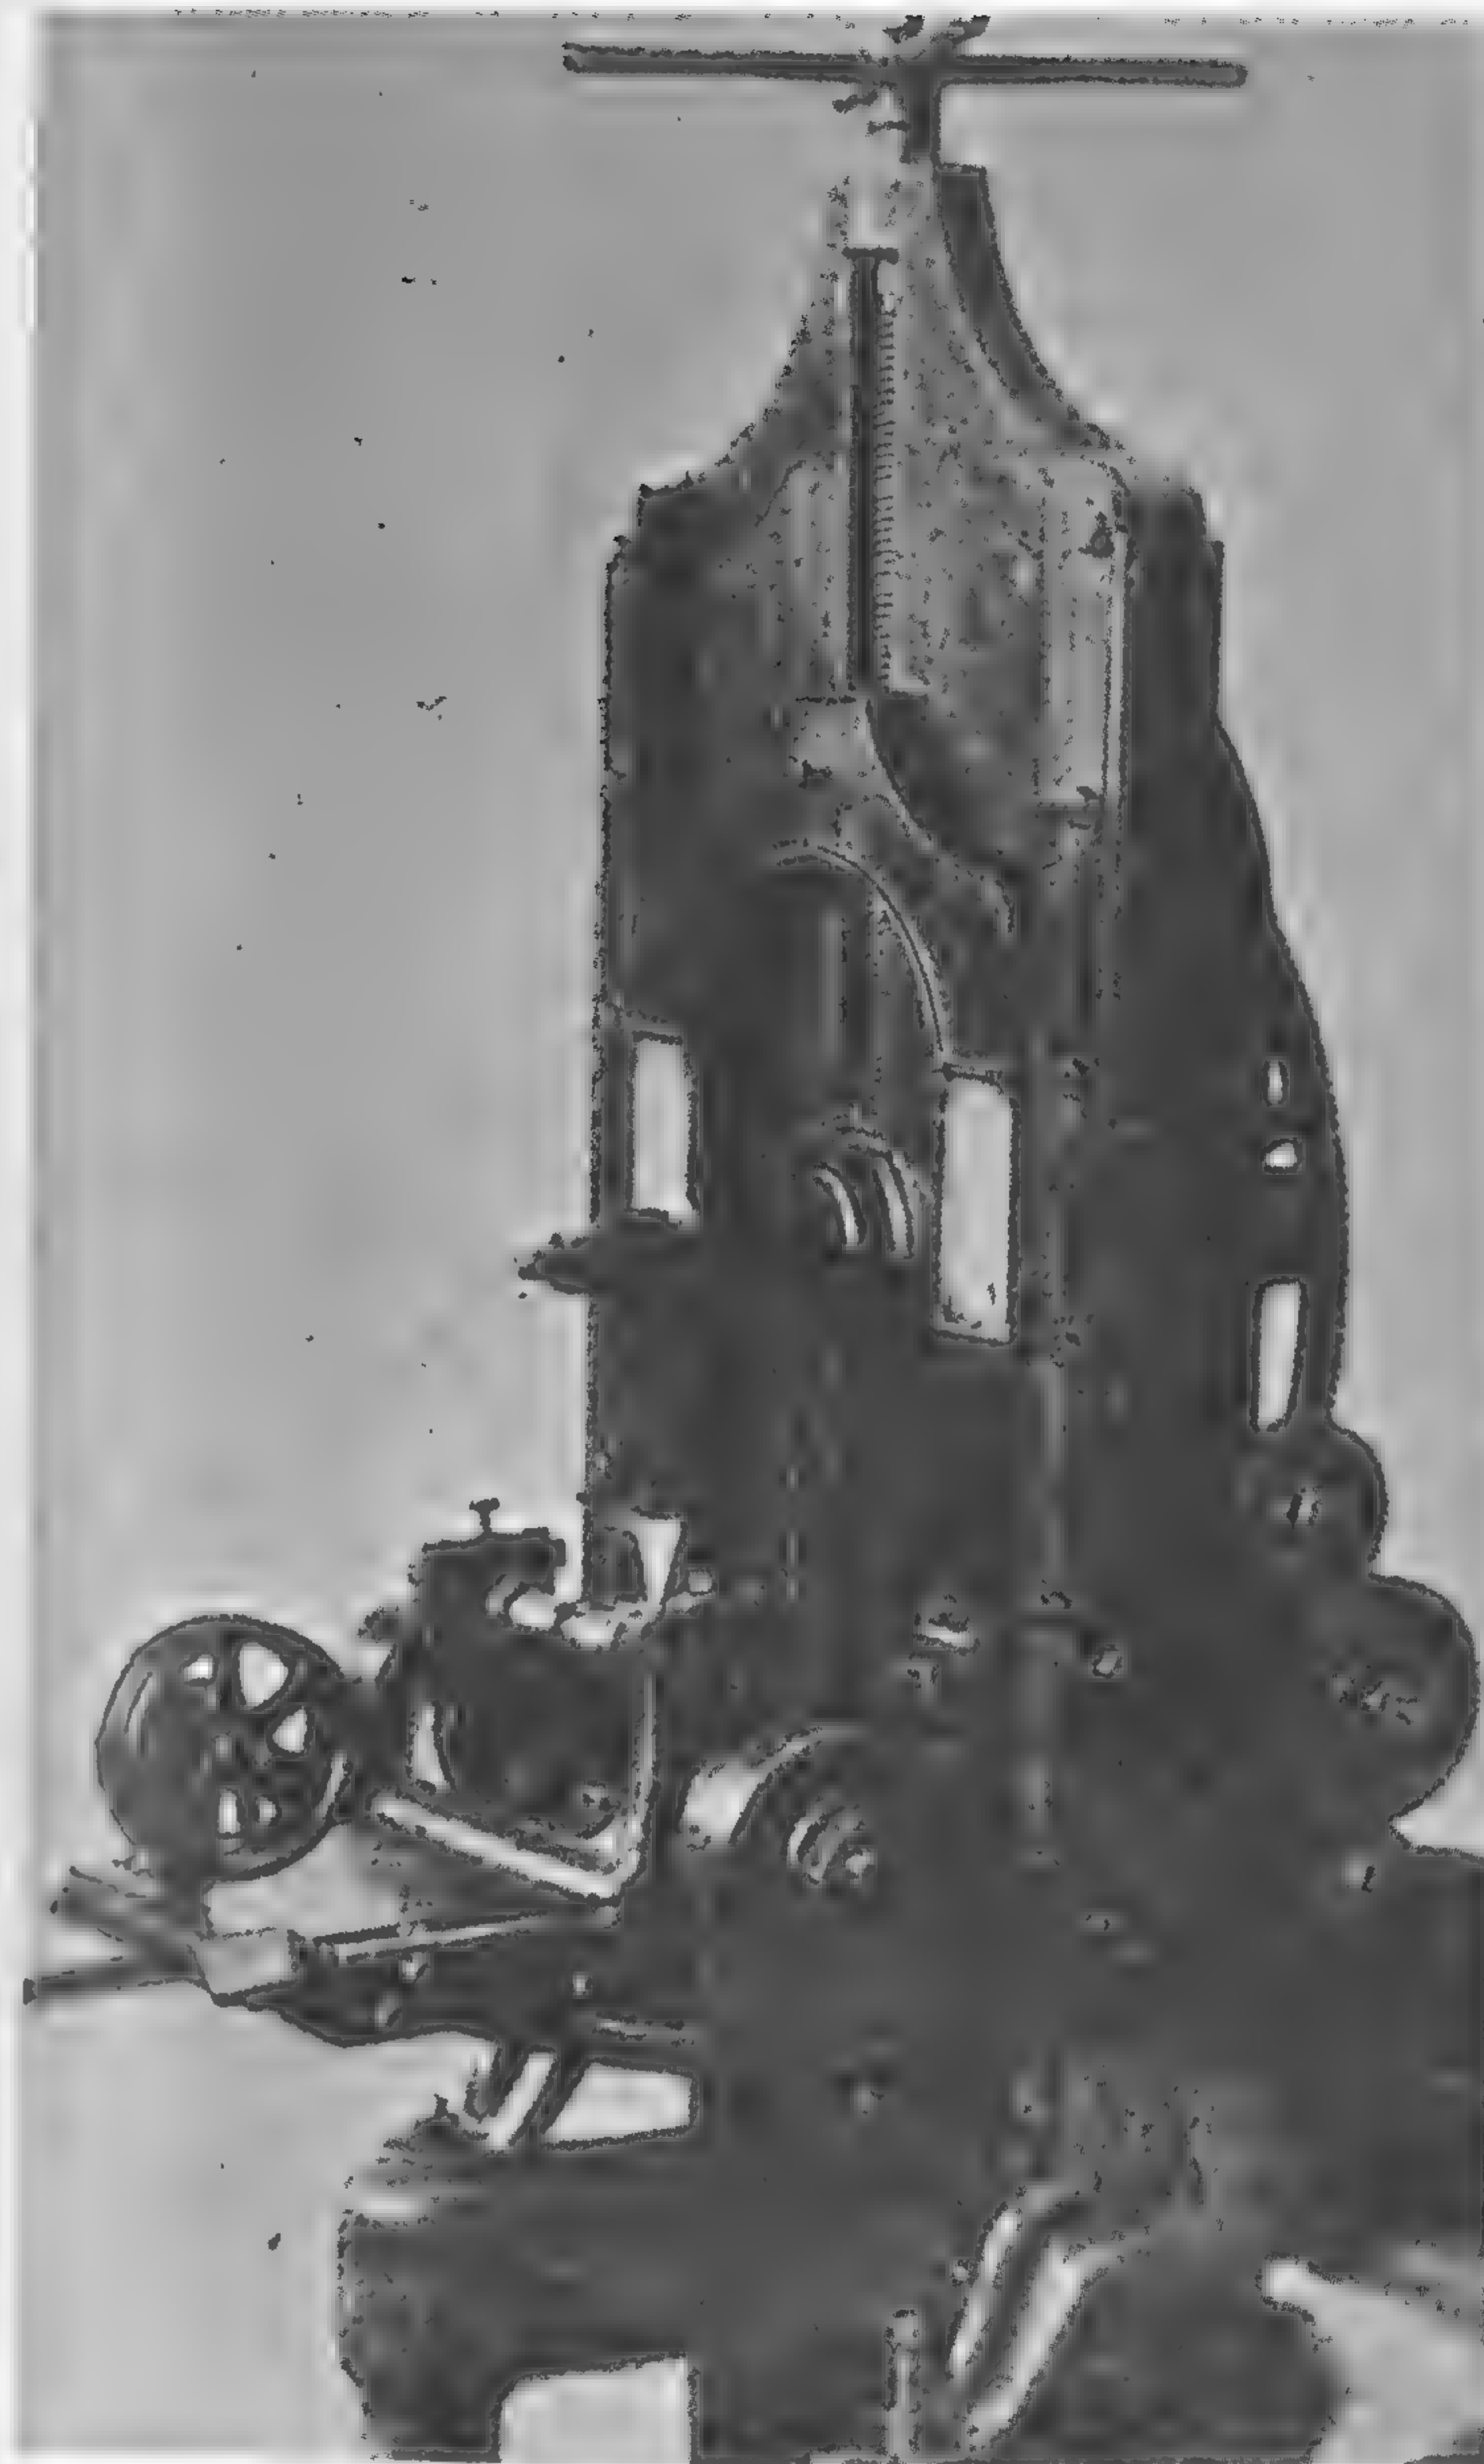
ROBERTS' GEAR-CUTTING MACHINE, 1824-1834 (*Inst. Mech. Eng.*)
